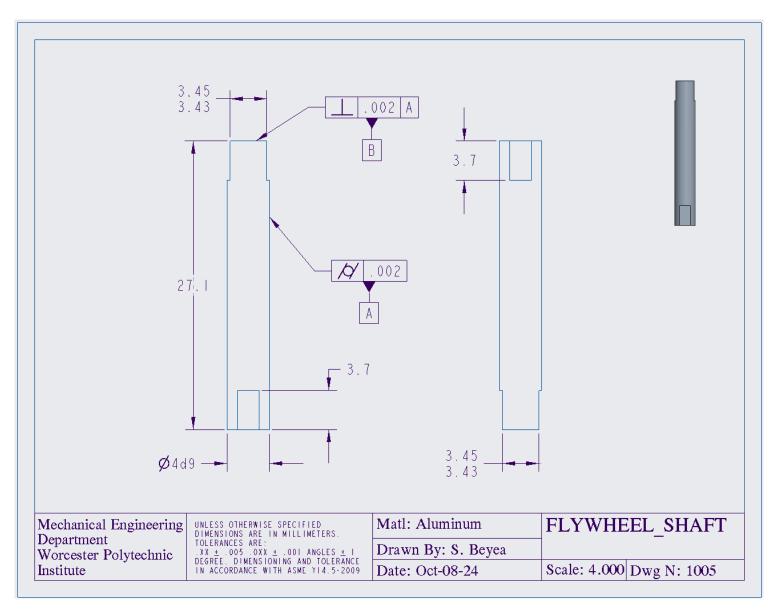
flywheel shaft which the bis and small flywheels mount to.
